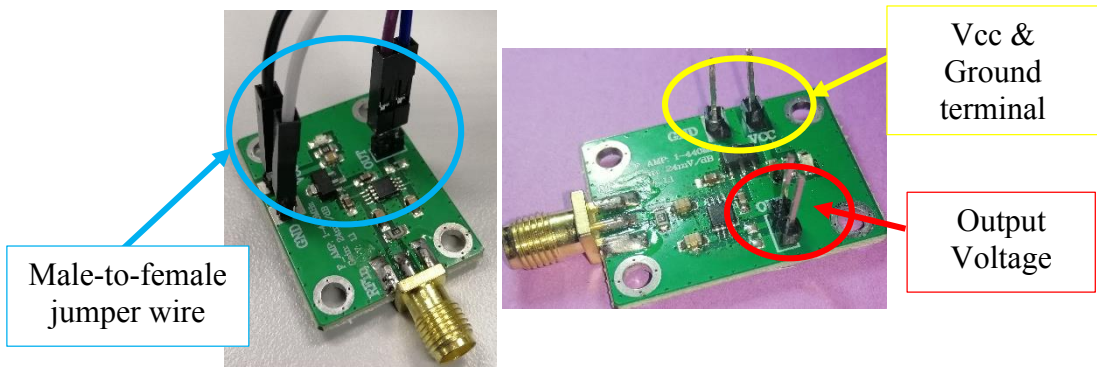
12: Jumper wire connection and Soldered DIP Pin on AD8318.
